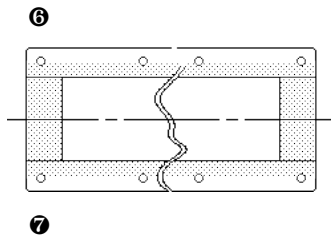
When installing containment couplings with an Ameron Rivetool, always alternate from side to side as indicated above to assure uniform tension on both sides of the fitting.
